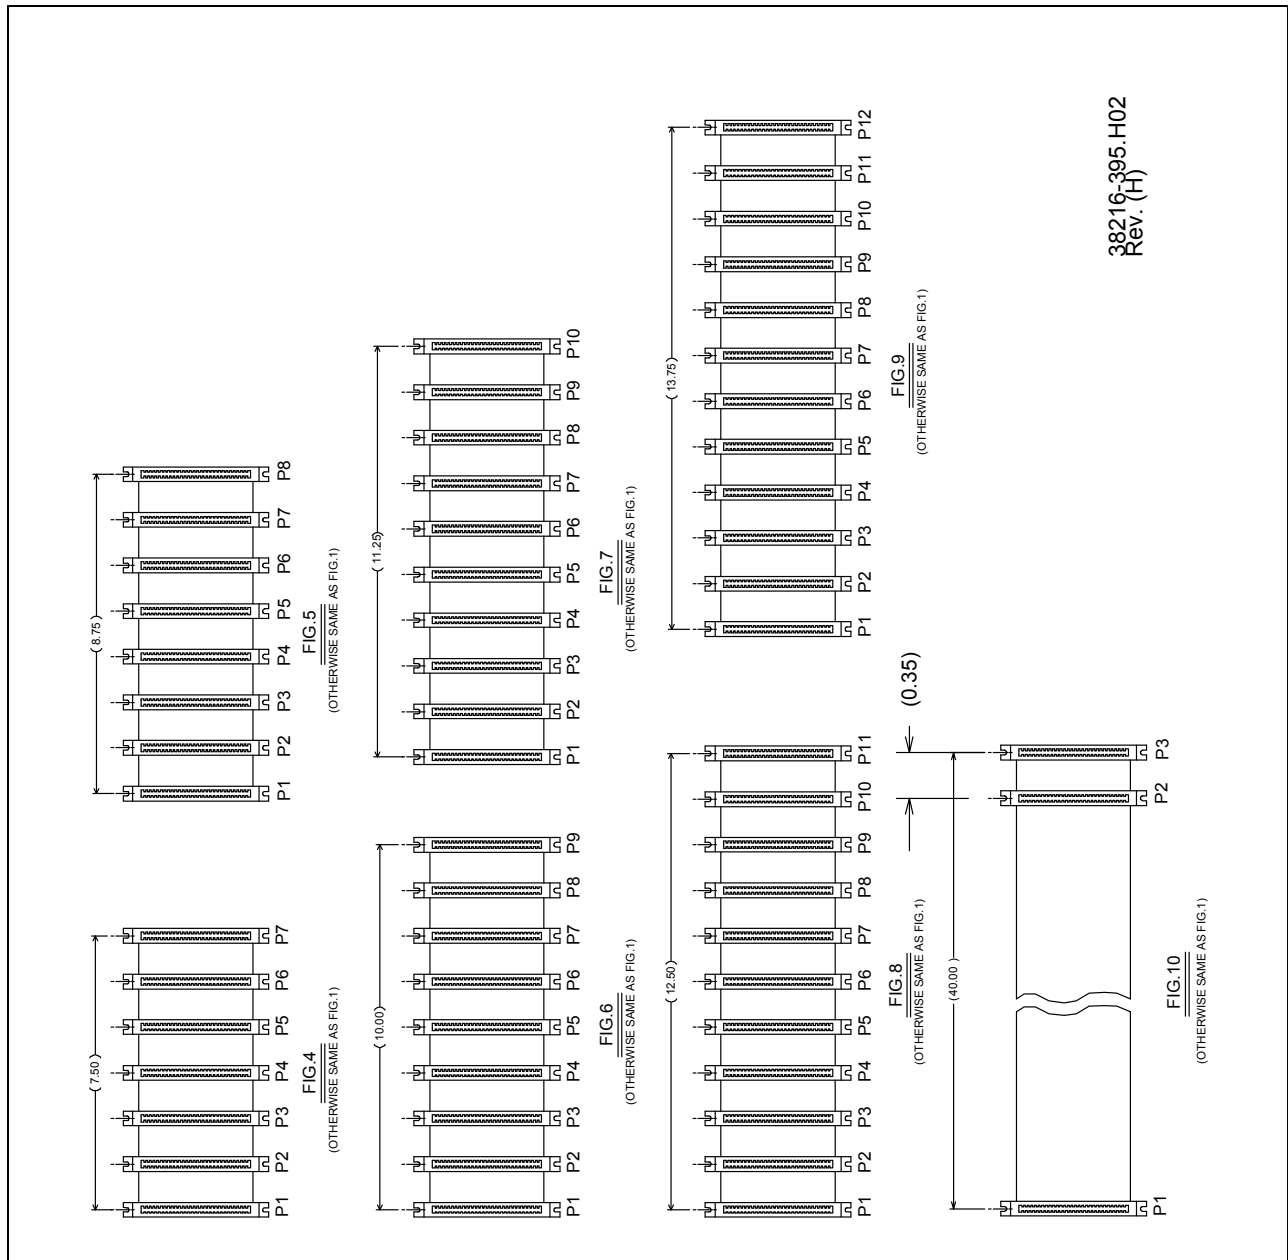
Cable, System Bus, P/N 38216-395-01 thru -10 (Sheet 1 of 2)
